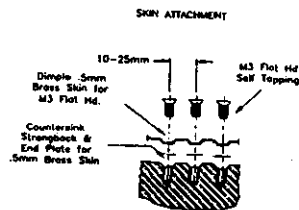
Fastening the skin to the Strongback, Endplate or Bottom plate.
